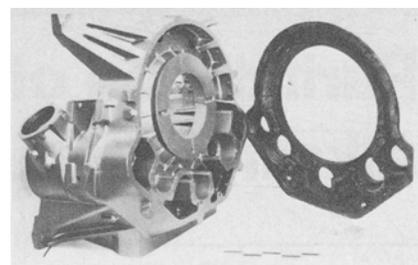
This casting, produced in ZE41, weighs 620 lbs. and is the main gearbox for the Westland WG34 helicopter.
